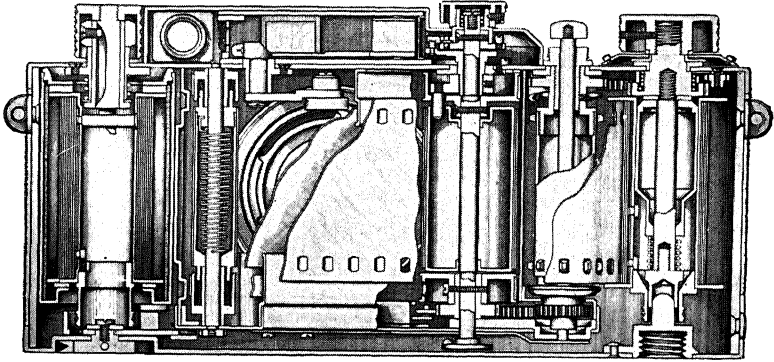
Back cross-section view of the Leica showing focal plane shutter, film, and all the actual working parts of the camera in cross-section
